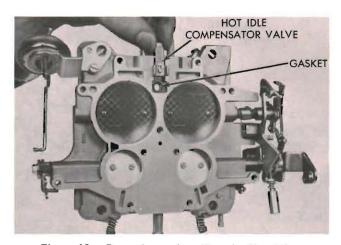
Removing or Installing the Hot-Idle Compensator Valve
